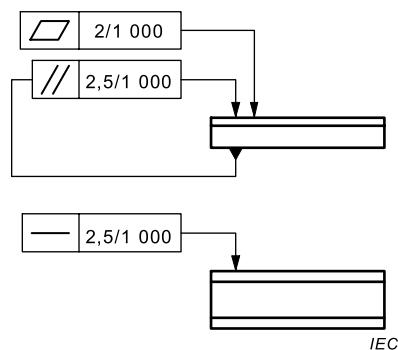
Tolerances (TH 15-5,5)
